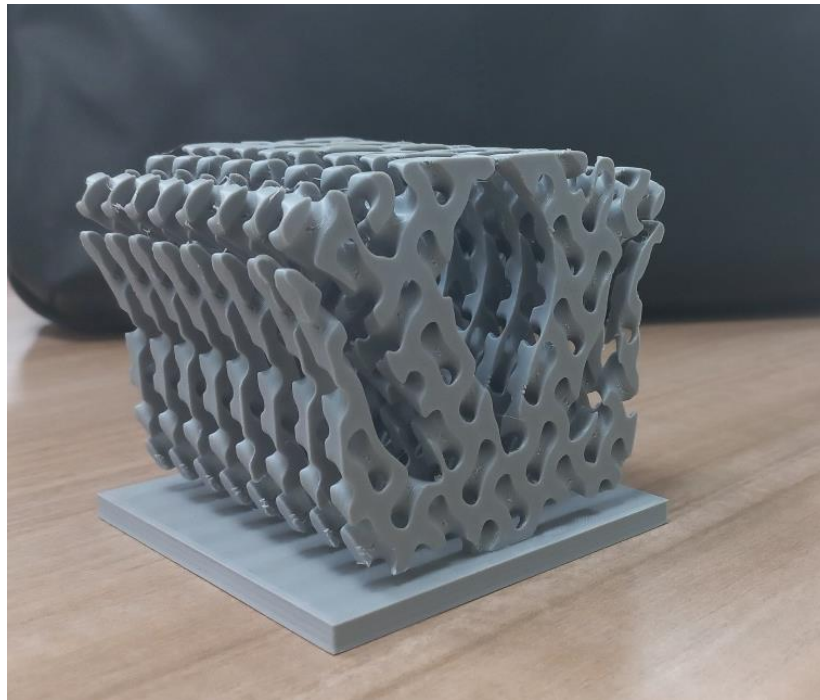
3D Printed Prototype of TPMS Mapped Heat Sink
